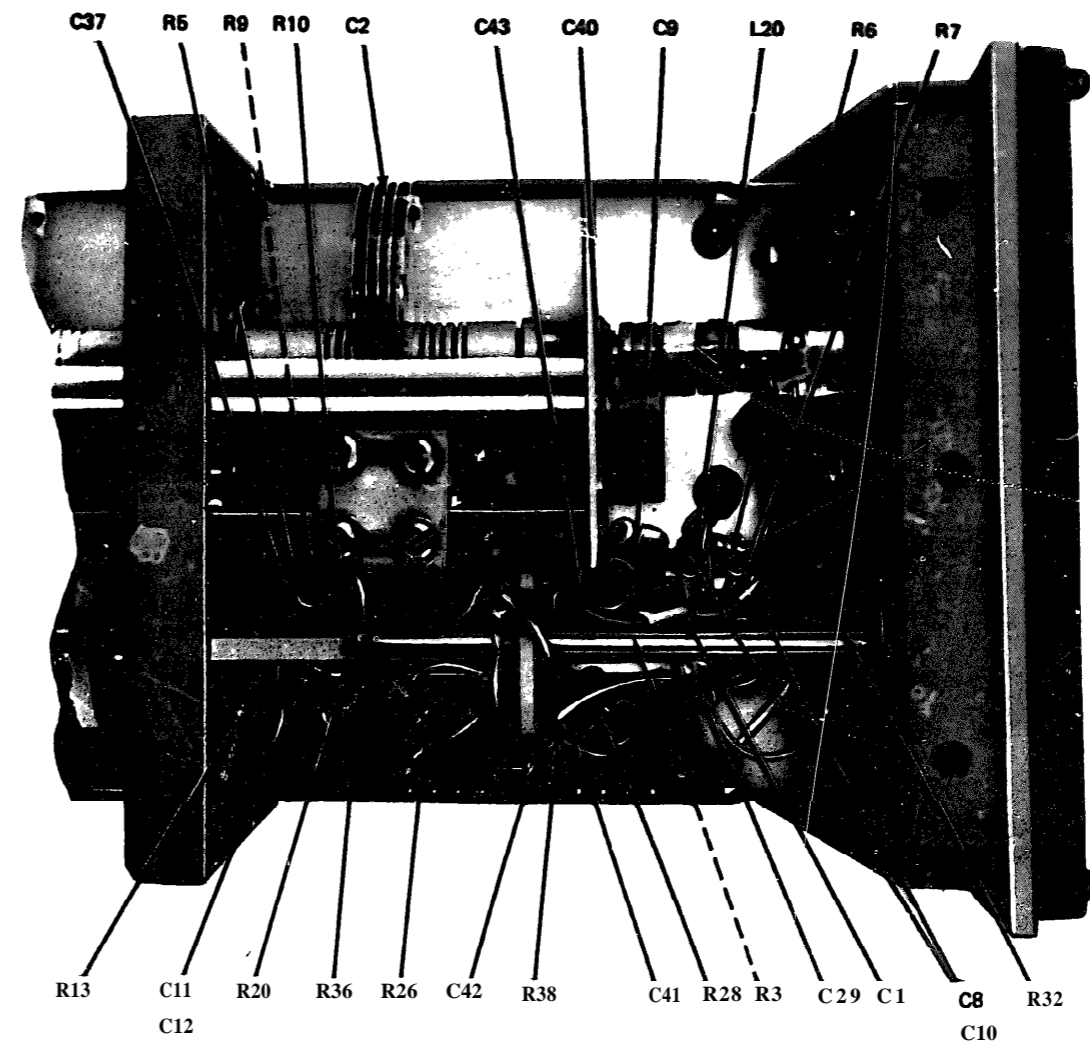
653B modulator partial left side view, cover removed. parts location
